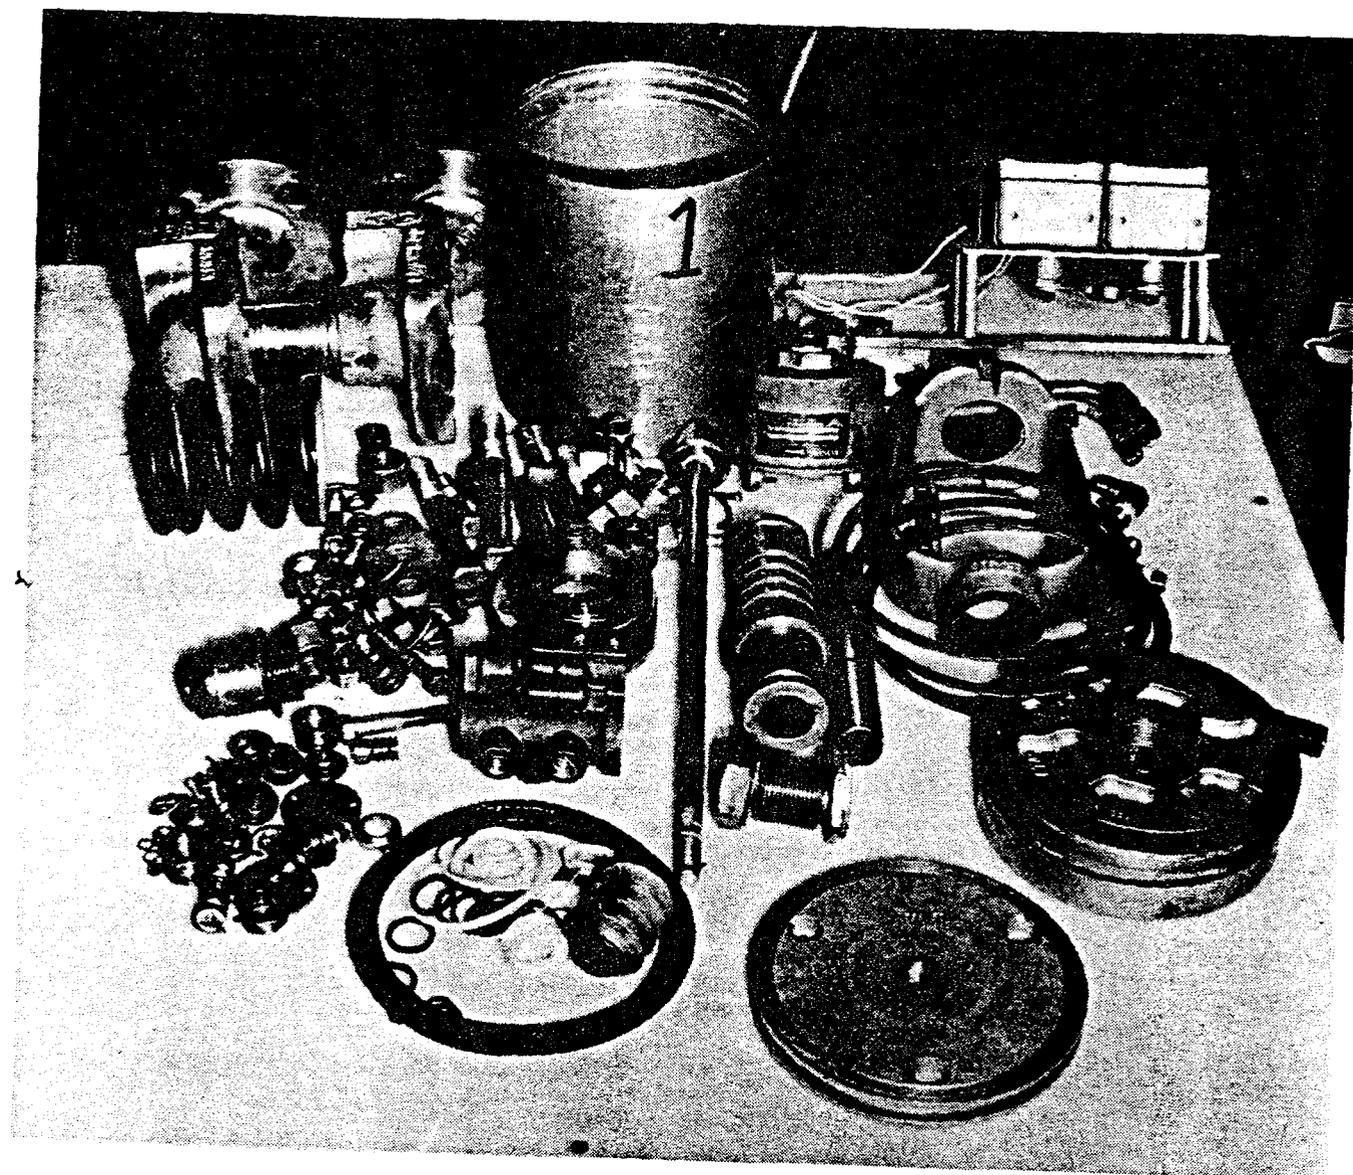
COMPONENT PARTS UPON DISASSEMBLY OF VALVE
